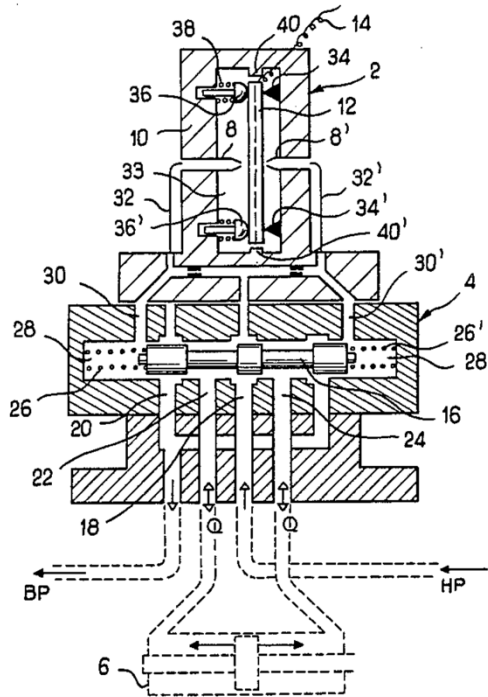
Piezoelectric double-layer plate actuating a nozzle flapper valve [38].
